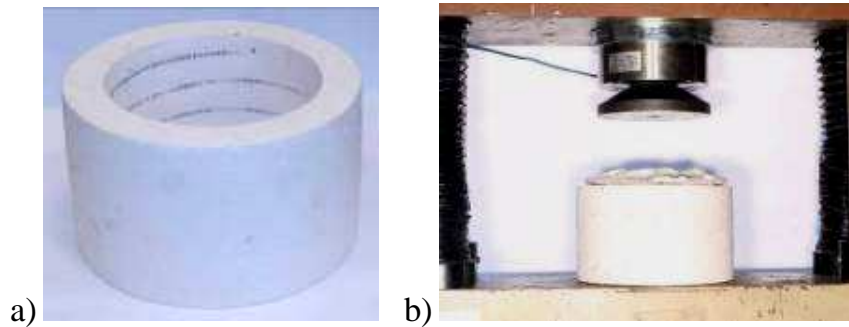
Stand for ECAP tests: a) furnace and b) stand for hot ECAP tests on TiraTest press
